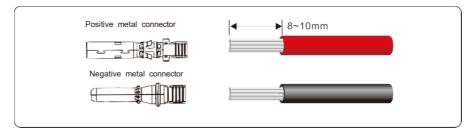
Removing insulation layer for DC cable (unit: mm)
